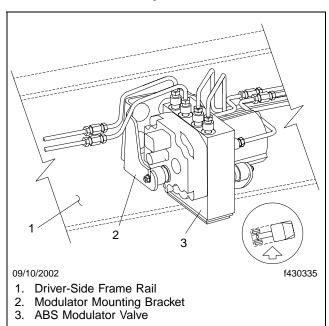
, ABS Modulator Assembly Mounting, "D" Version
